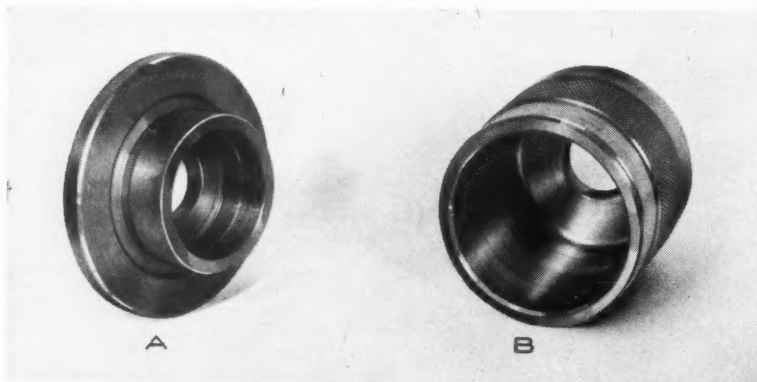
Two parts of entirely different design that were produced on the same four-spindle Conomatic by a comparatively simple change-over of the machine
